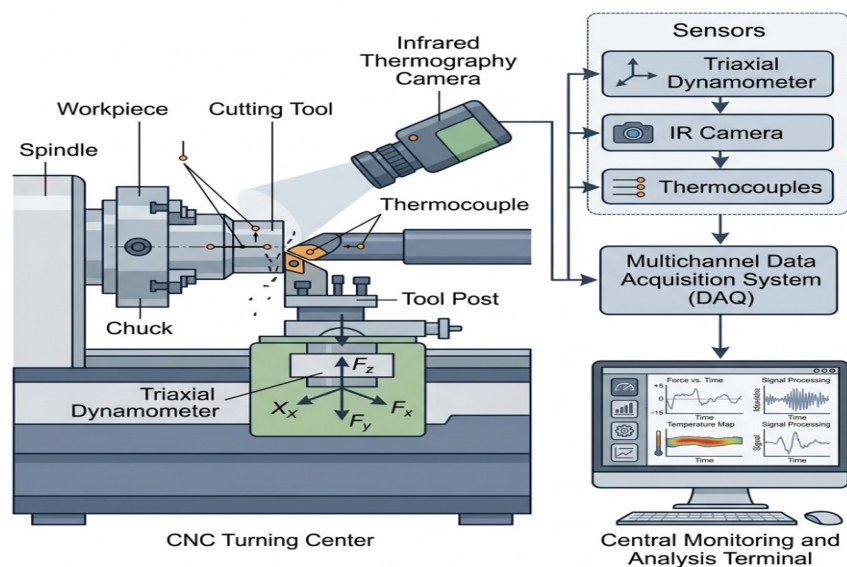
Comprehensive Schematic of the Instrumented CNC Machining Setup
